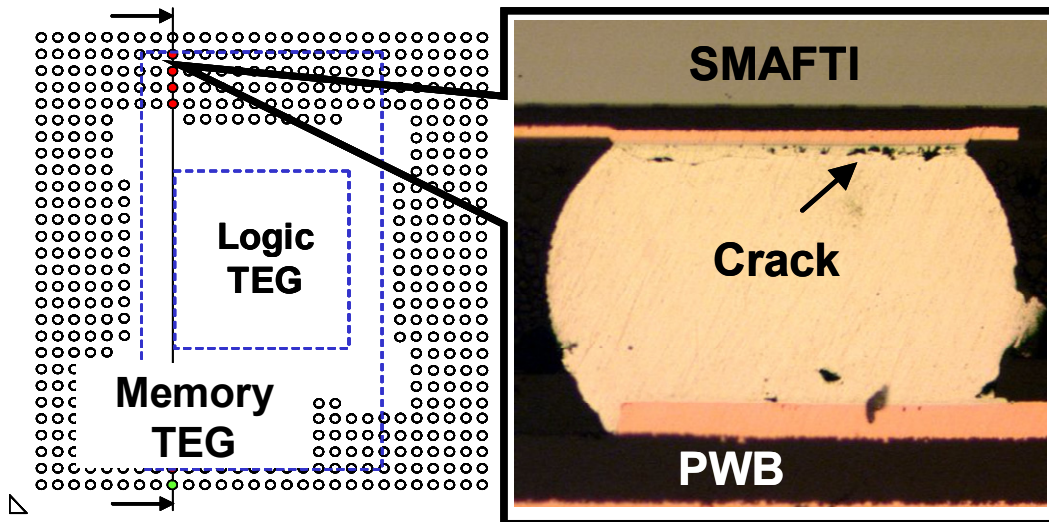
Cross section of cracked solder joint under thermal cycle test.
